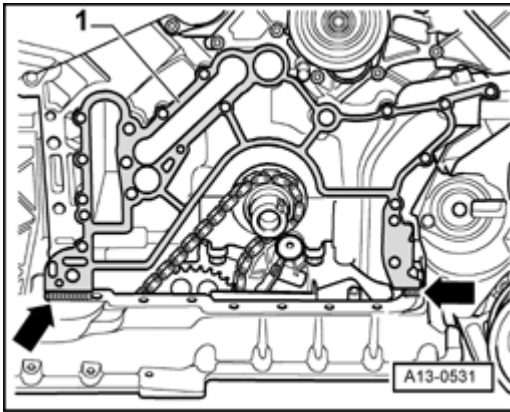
Placing New Sealing Ring Onto Cylinder Block & Applying Thin Silicone Sealing Bead Each Between Cylinder Block And Upper Part Of Oil Pan
